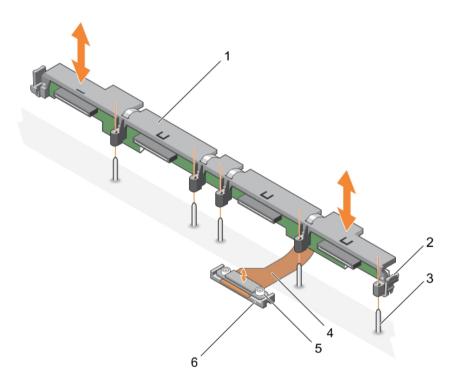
Removing a 2.5 inch (x4) SATA hard drive/SSD backplane
